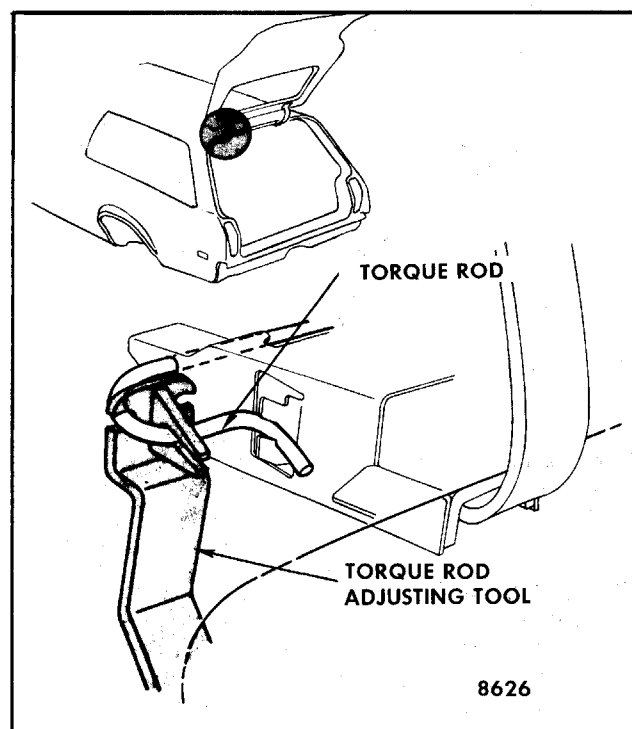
Torque Rod Adjustment - "H-15" Styles
